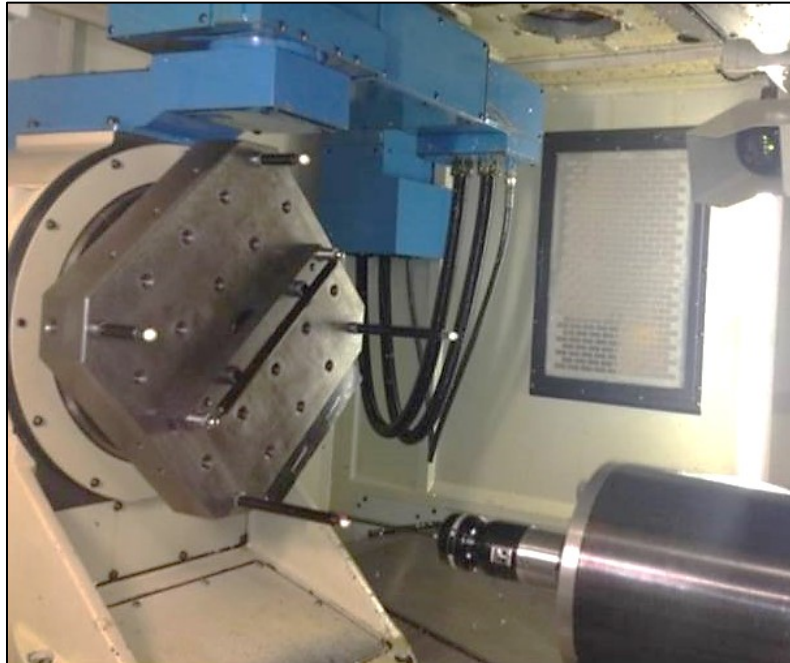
Scale and master balls being probed with an MP700 Renishaw probe on a Mitsui Seiki HU40-T machine tool of topology wCBXfZY(C1)t
